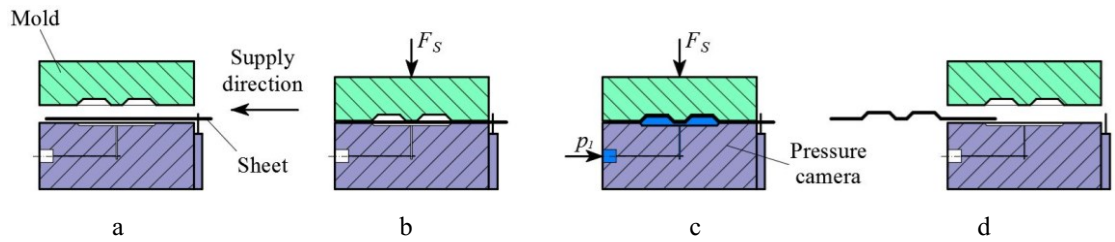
Schematic representation of hydraulic deep-drawing (hydroforming) process of honeycomb sheets [82]
